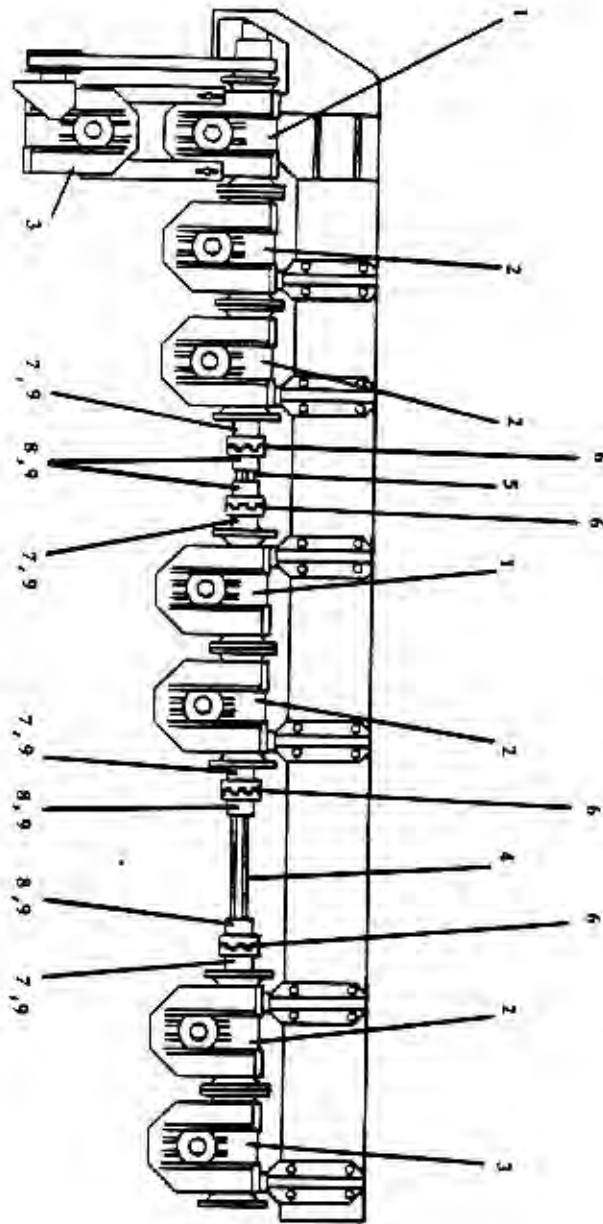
FEED ROLL DRIVES AND GEARBOXES
